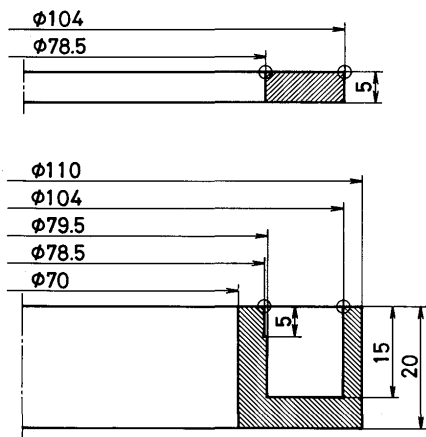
Shape of the workpieces used for preliminary experiments. A symbol ○ shows the positions to be welded.
